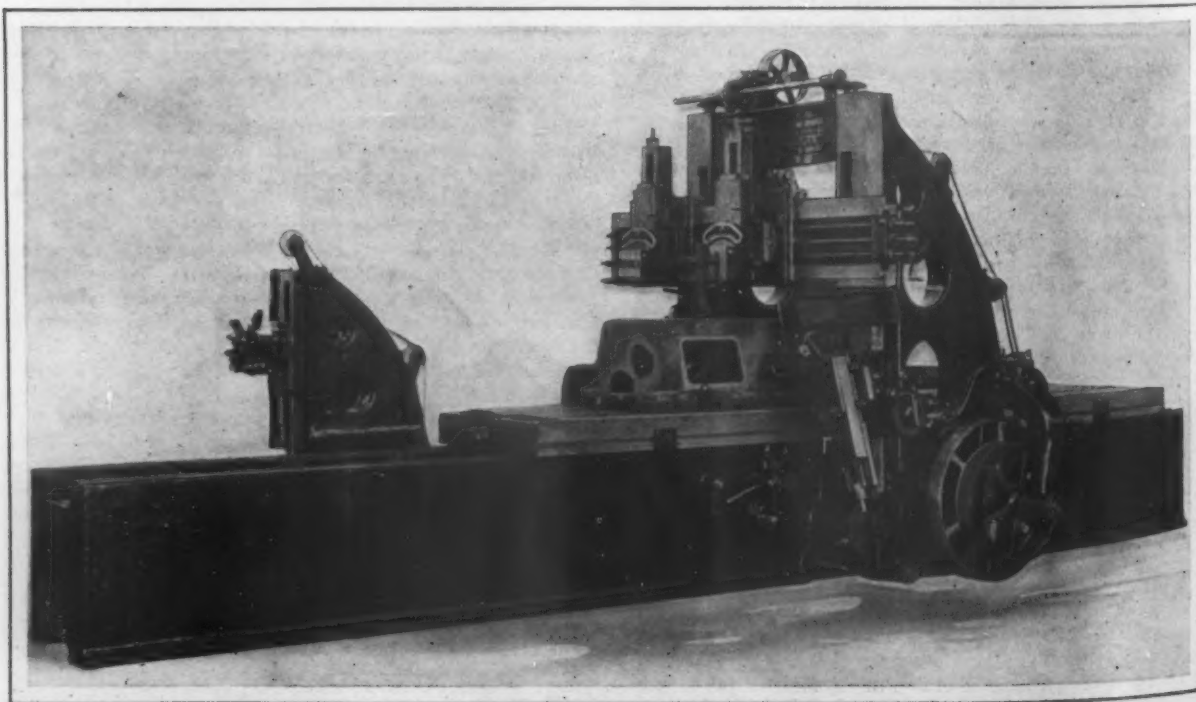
The Combined Double Housing and Open Side Planing Machine for Handling Gas Engine Bases Built by Joseph T. Ryerson & Son, Chicago, Ill.
